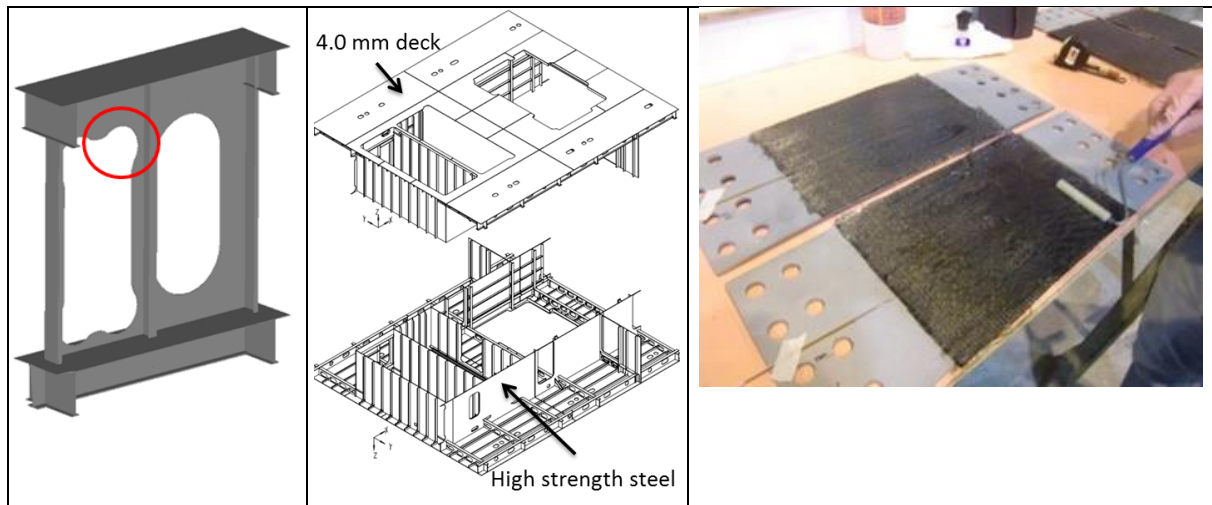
(a) Curved cut-out to reduce notch effect; (b) steel deck structure; (c) composite patches being applied on welded steel specimens
